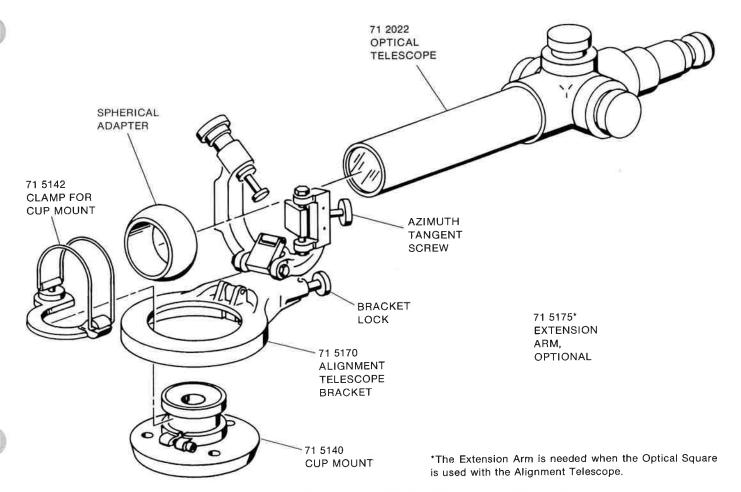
Assembly of Cup Mount, Spherical Adapter, Bracket, and Alignment Telescope
